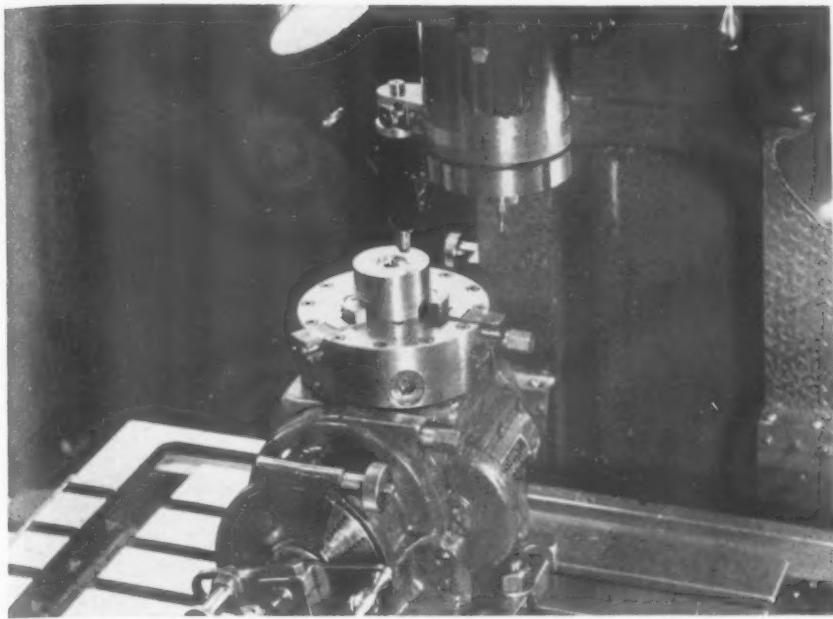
Center Scope, mounted in spindle of rotary head milling machine for checking on job.
